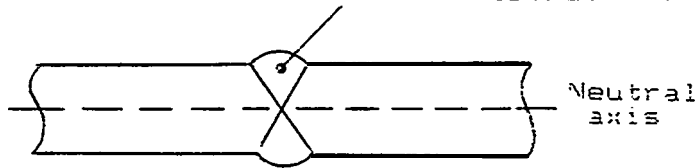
Locating weld joints to balance shrinkage forces around the neutral axis of a weldment
